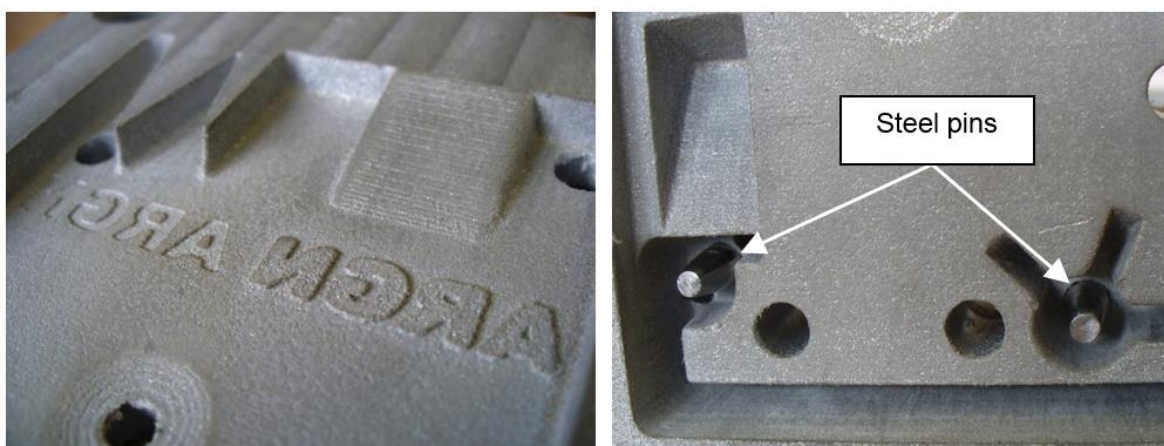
Machined and polished Alumide[®] insert with steel pins for producing hole features.
